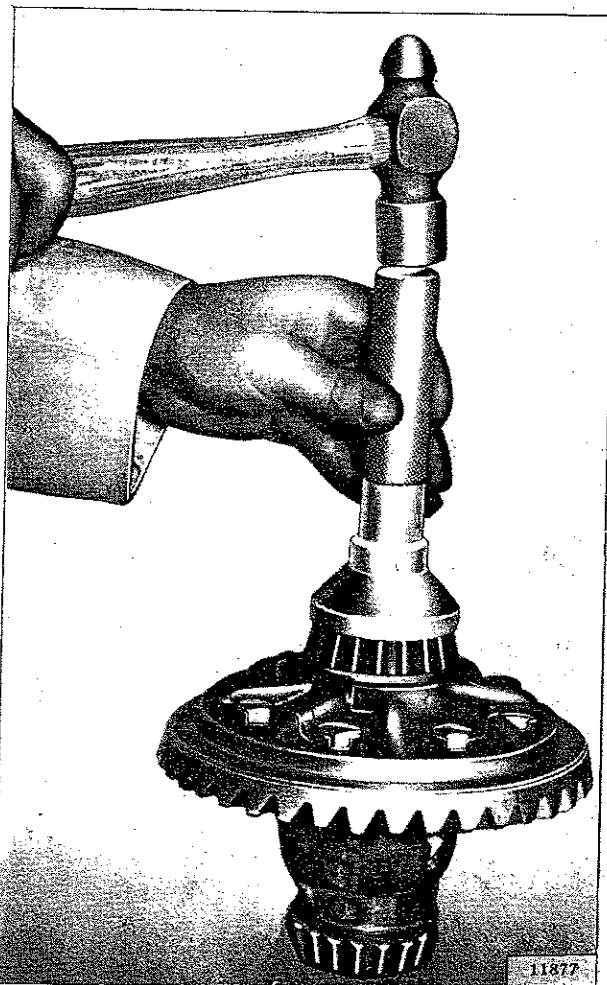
DIFFERENTIAL BEARING DRIVER
